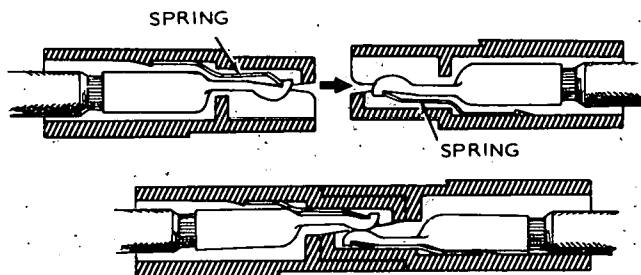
CONNECTOR HOUSING AND TERMINAL CONNECTION DETAILS
